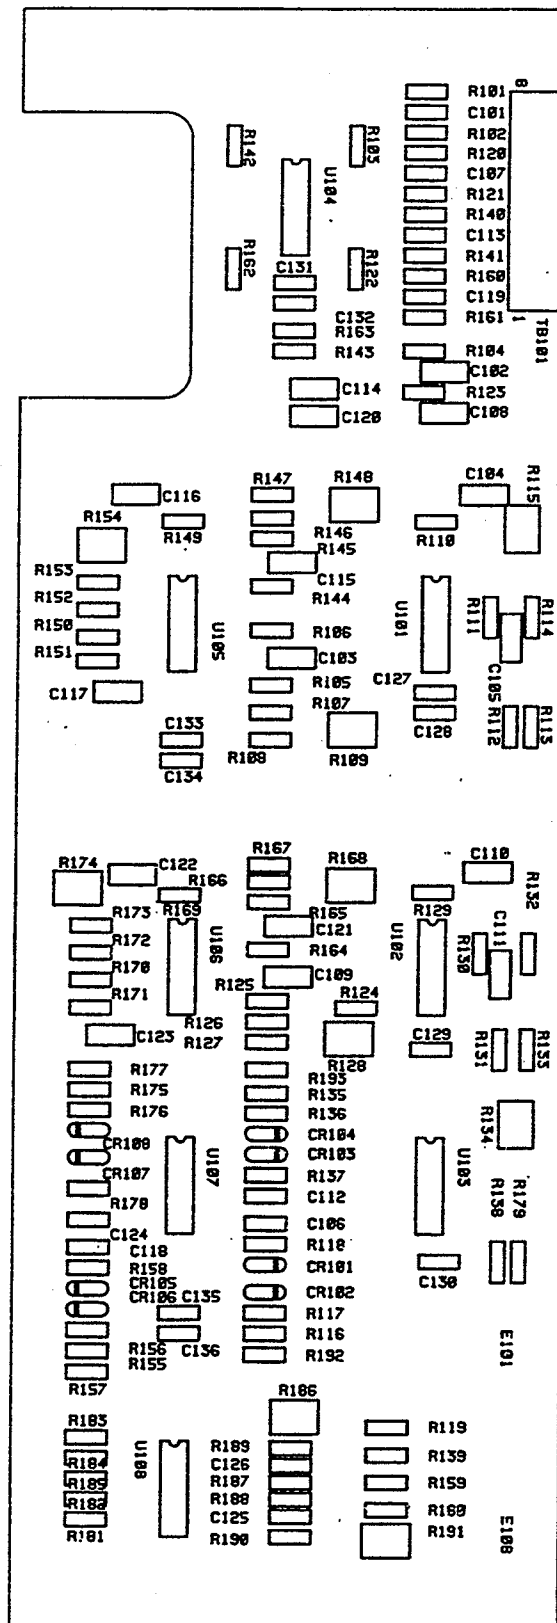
Component locator drawing, ring option for RFL 95 ORDERWIRE (Assembly No. 100825; Drawing No. 100828, Rev. F)
